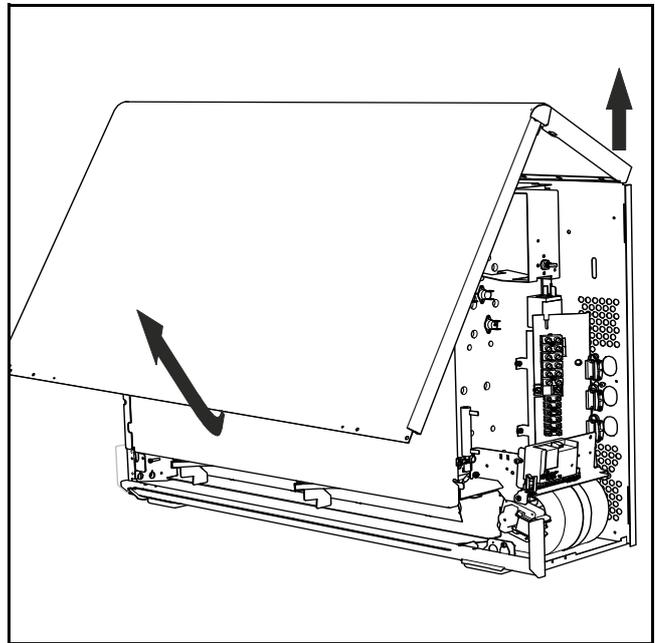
Pull the front panel forwards while lifting it gently to remove it from its rear attachment.
